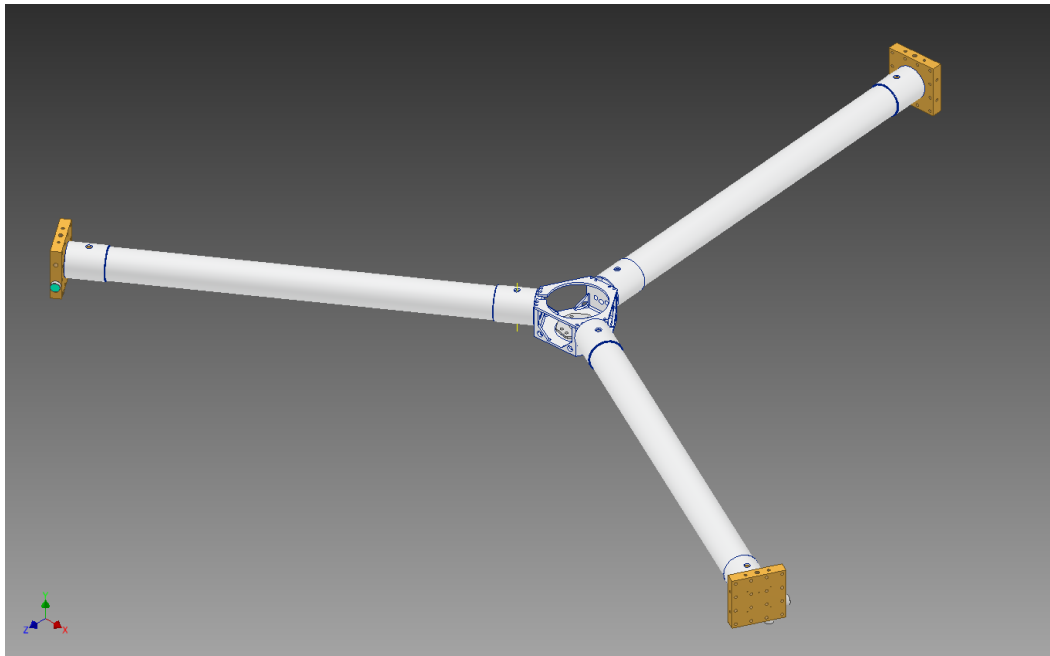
CAD drawing designed by Dr. Leonid Prokhorov of the 6D test mass.
